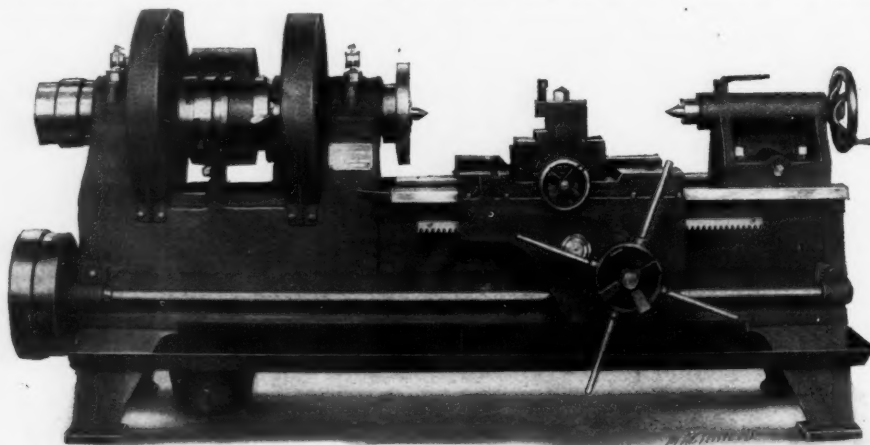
Johnston & Jennings 20-inch Manufacturing Lathe built with 8- or 10-foot Bed
